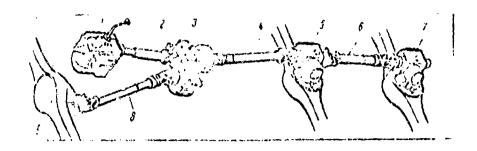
Universal drive of the ZIL-131 motor vehicle:
